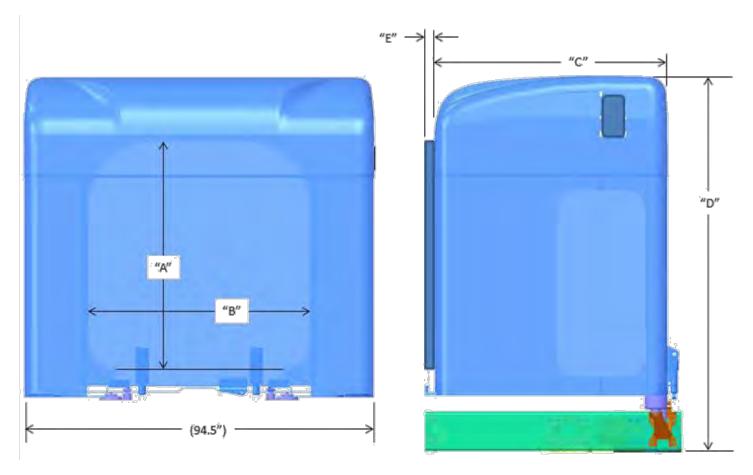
Sleeper Dimensions – Front & LH View
